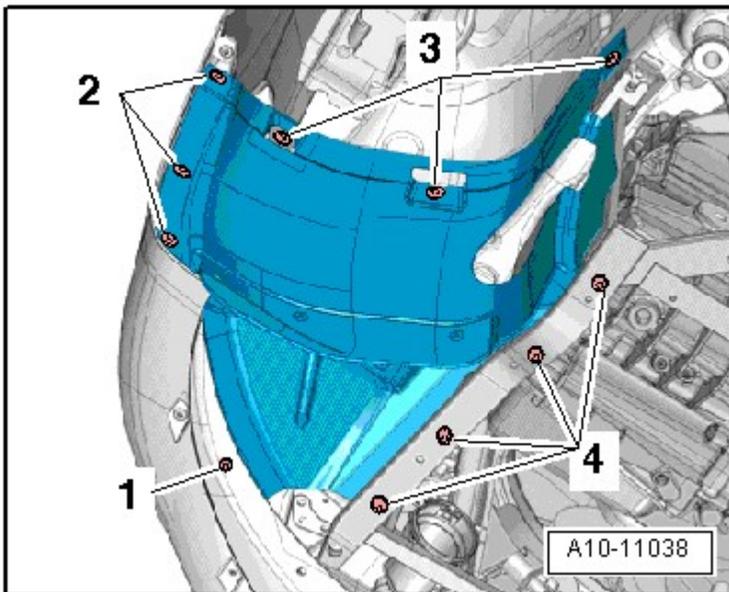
Identifying Front Section Of Left Front Wheel Housing Liner
